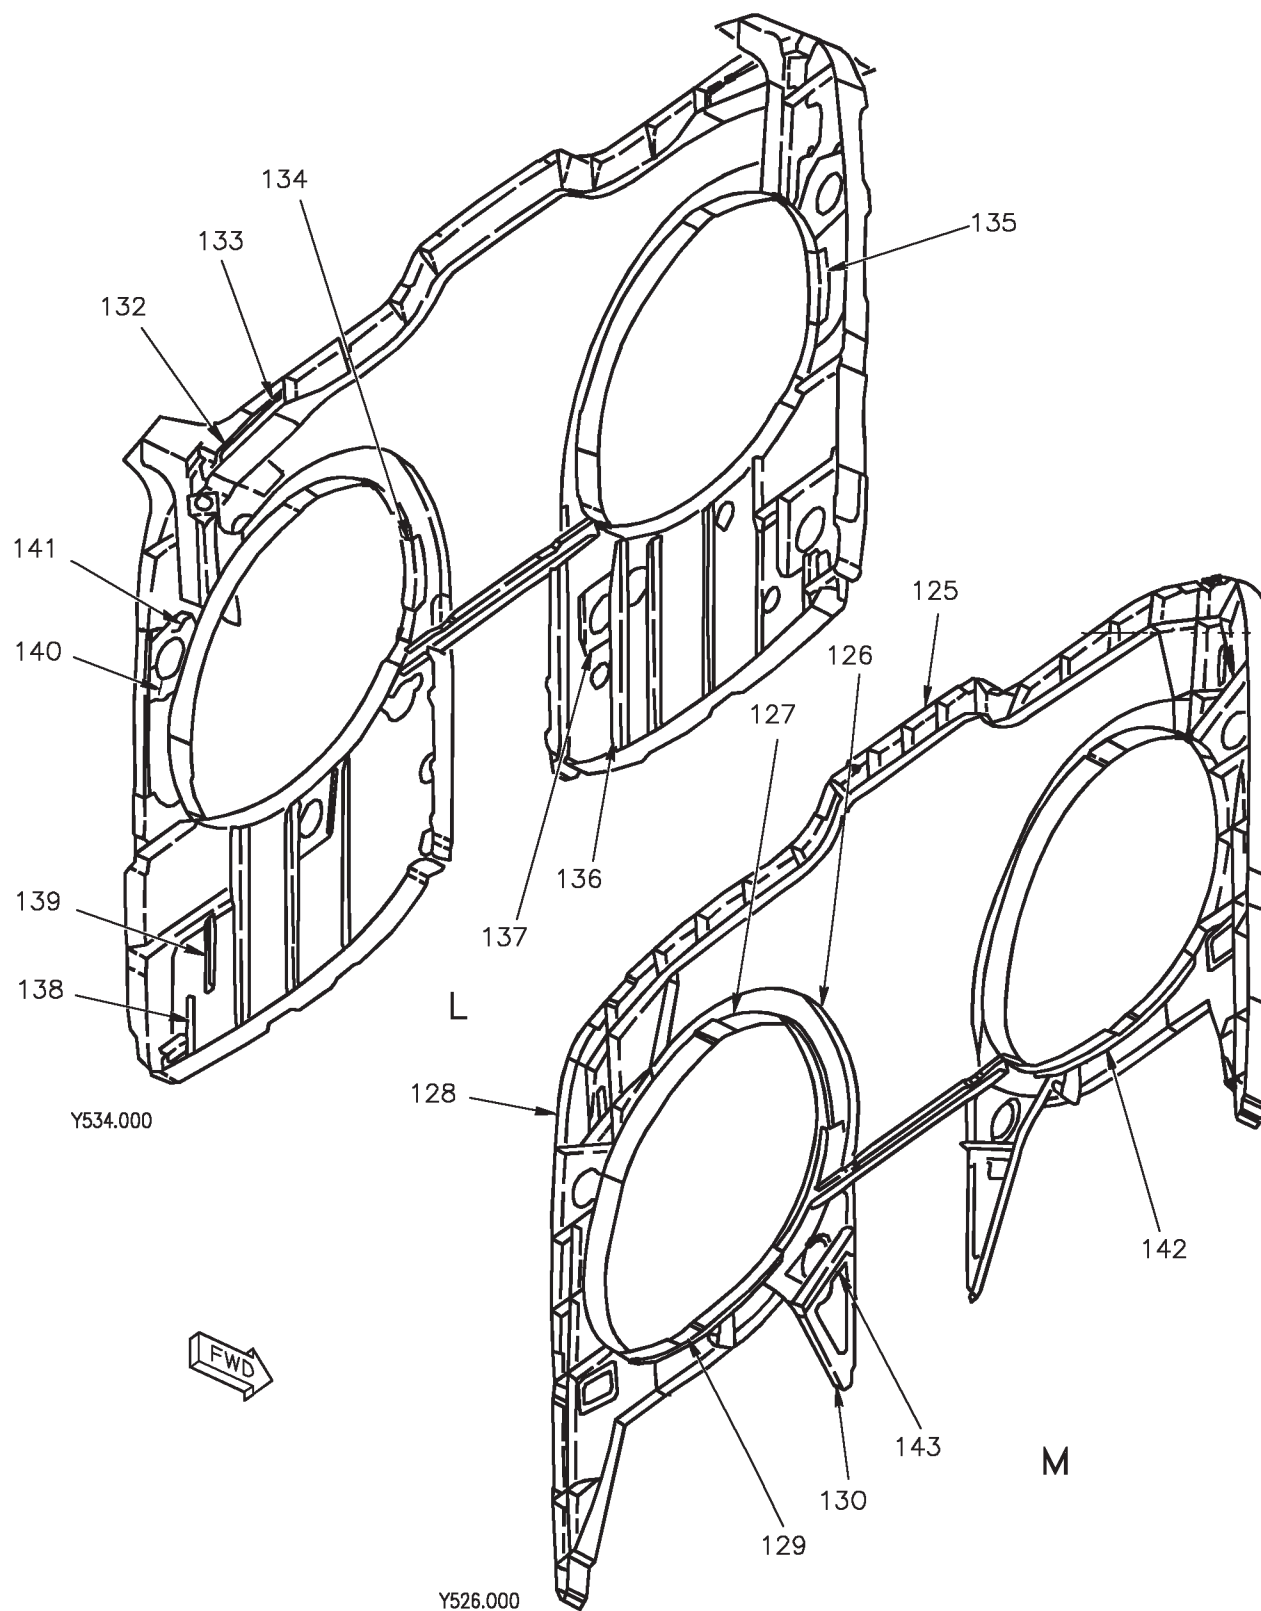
Bulkheads, Formers, Longerons, and Stringers (Sheet 9)
